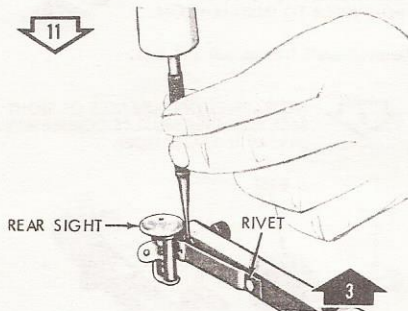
Disassembly/Assembly of Sight Assembly. (Direct and General Support Maintenance)
